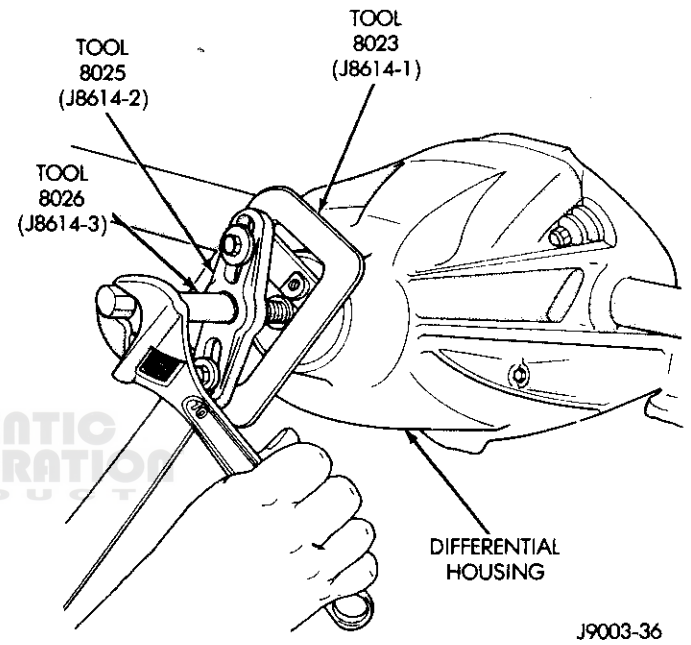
Drive Pinion Gear Shaft Yoke Removal
